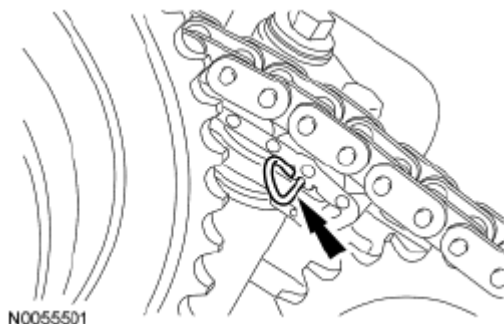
Locating LH Secondary Timing Chain Tensioner Lockpin
